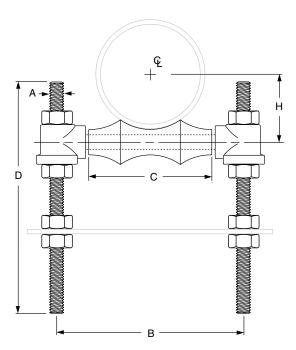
WEIGHT (LBS) • DIMENSIONS (IN)
